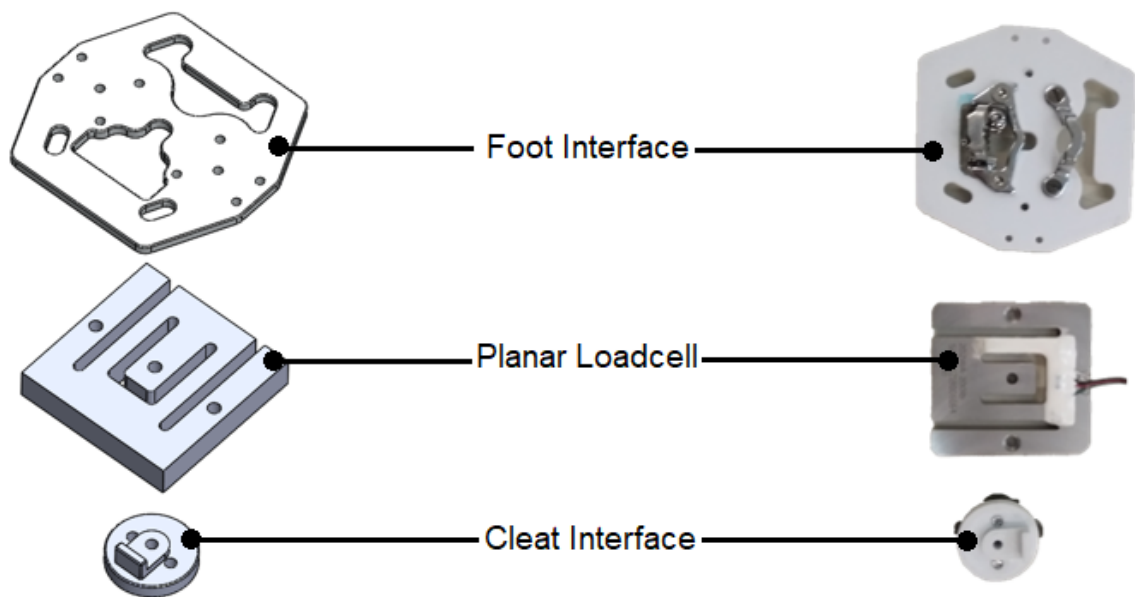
Exploded view on the left with the respective prototype on the right
